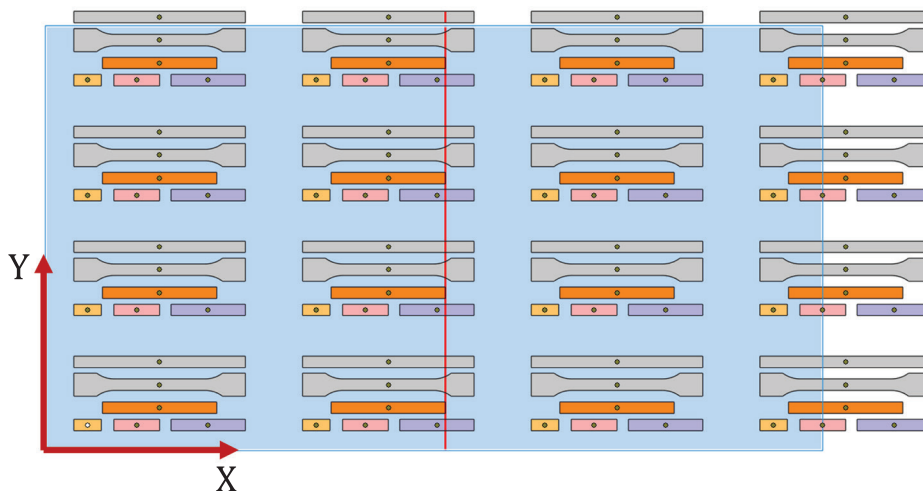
Multiplied grid arrangement for test specimens in XY direction for an example machine during powder bed fusion (build area size 700 mm × 380 mm)
